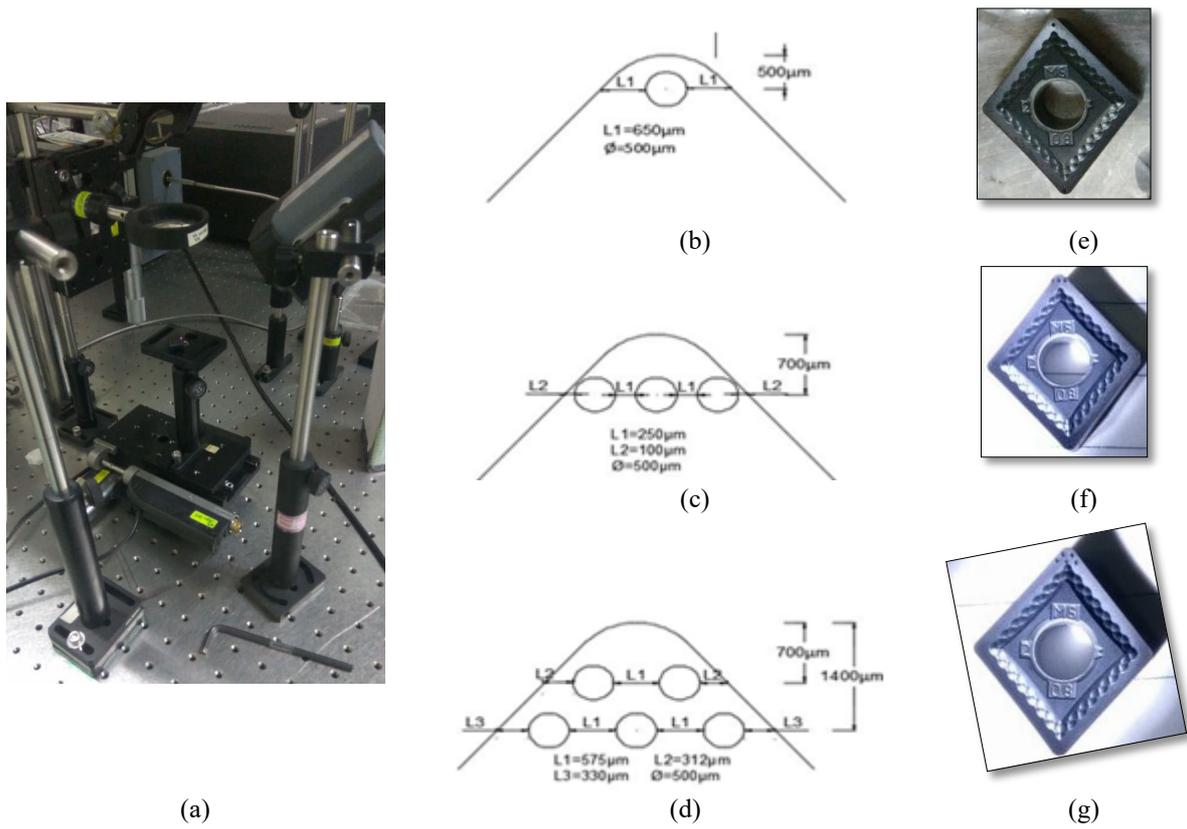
(a) Table set-up to place cutting tool for hole drilling, hole dimensions for (b) G1 tool (c) G3 tool (d) G5 tool, and inserts with holes drilled for (e) G1 tool (f) G3 tool (g) G5 tool.
